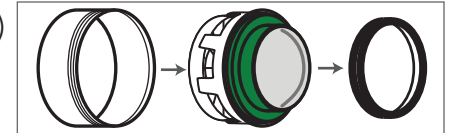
Disassembled aerator. A - Metal case; B - Plastic case;
